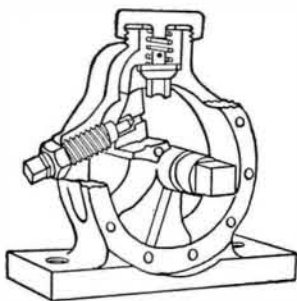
Hotchkiss Shock Absorber With Cover Removed and Section Broken Away to Show Check-valve and By-Pass.
